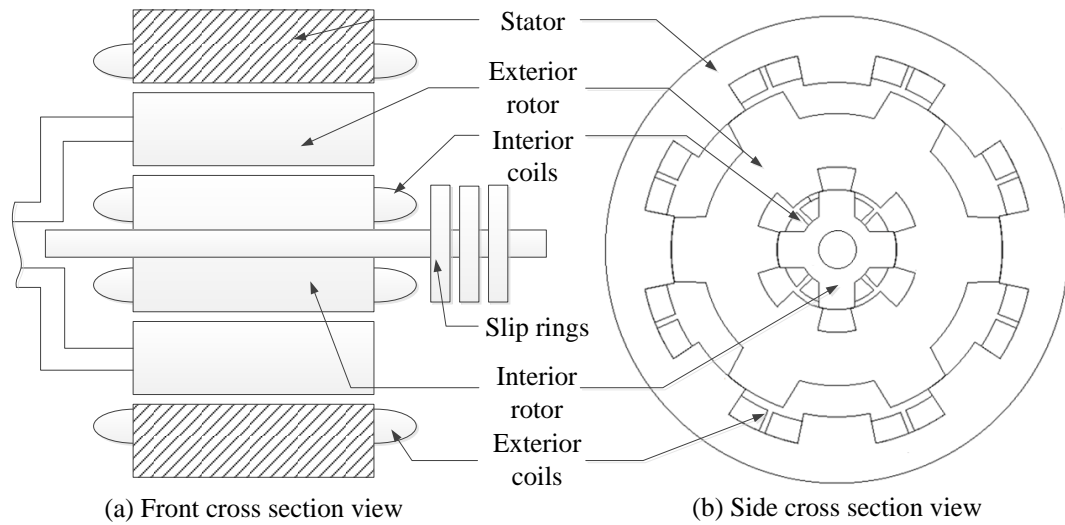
DRSRM with external stator and rotating windings on the inner rotor
